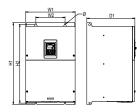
Wall mounting of 3PH 400V 90-110kW VFDs (Dimension (unit: mm))
